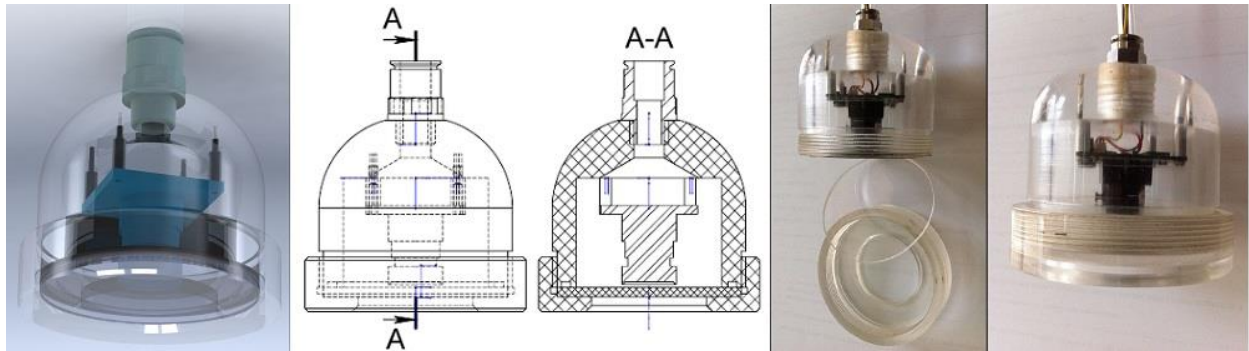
Camera (the front, manipulator, and middle) in the housing (CAD model, drawing and real assembly)
